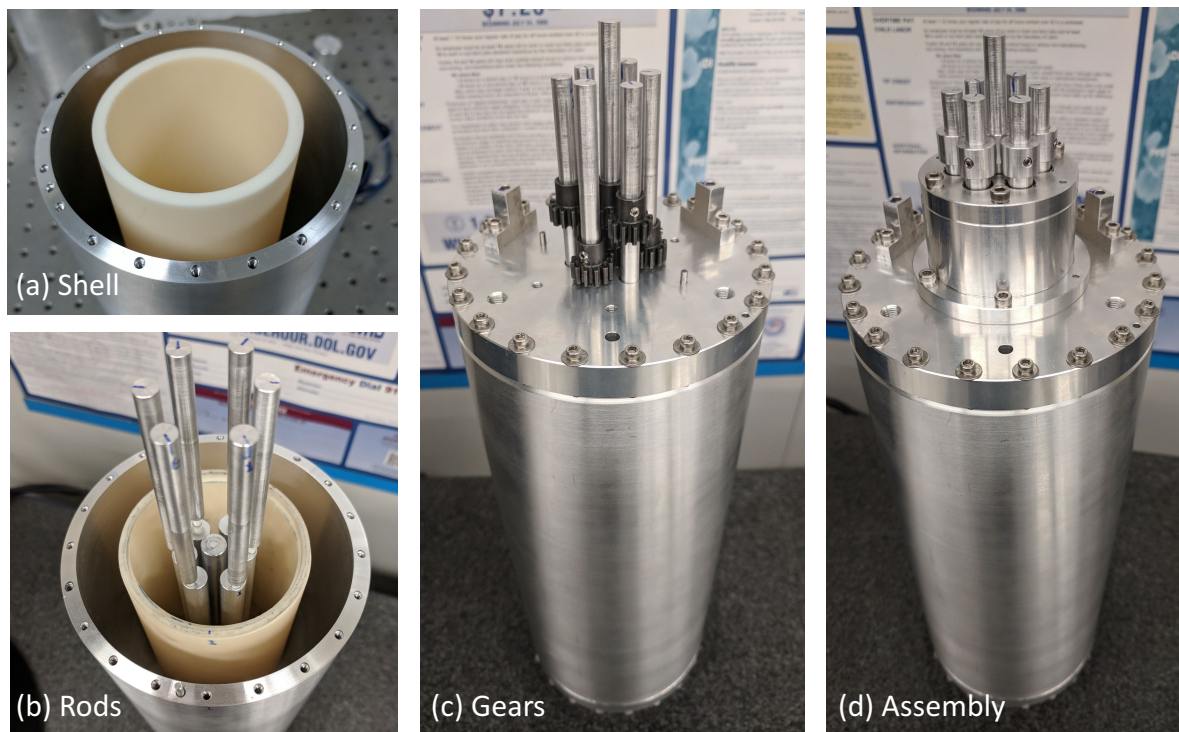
Seven rod with shell design photos. This prototype cavity is machined from aluminum with (a) an alumina shell, (b) six aluminum rods that rotate symmetrically and are connected by (c) gears to each other to create (d) the complete assembly.
